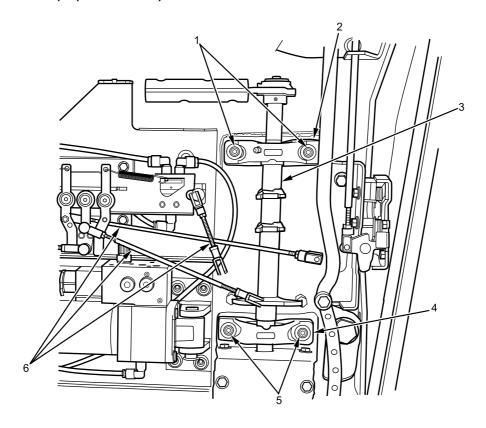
Door Interior Handle Shaft Assembly Partial Installation.
